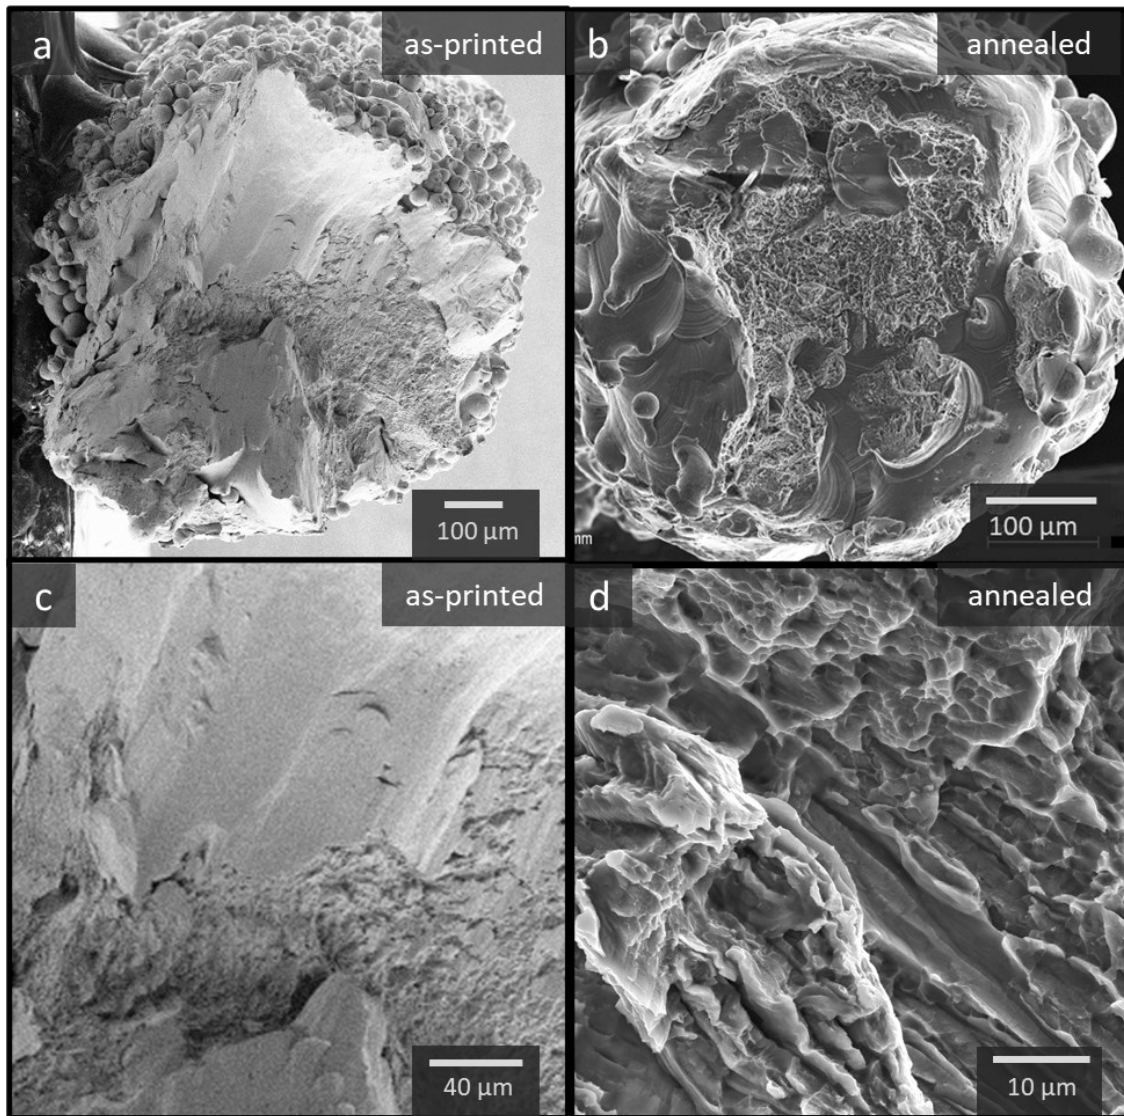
| Fracture surfaces of struts. a, b, 0.8 mm/as-printed and 0.5 mm/annealed struts showing low consolidation areas and c, d, close-ups of the respective surfaces showing different fracture morphologies.
